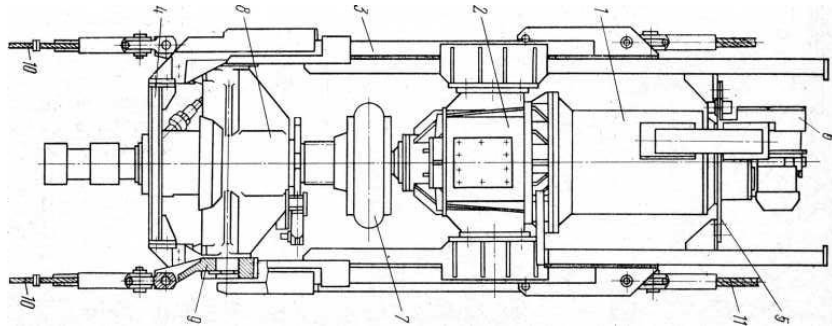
Rotary Mechanism of the SBSH-250MN Drilling Rig
